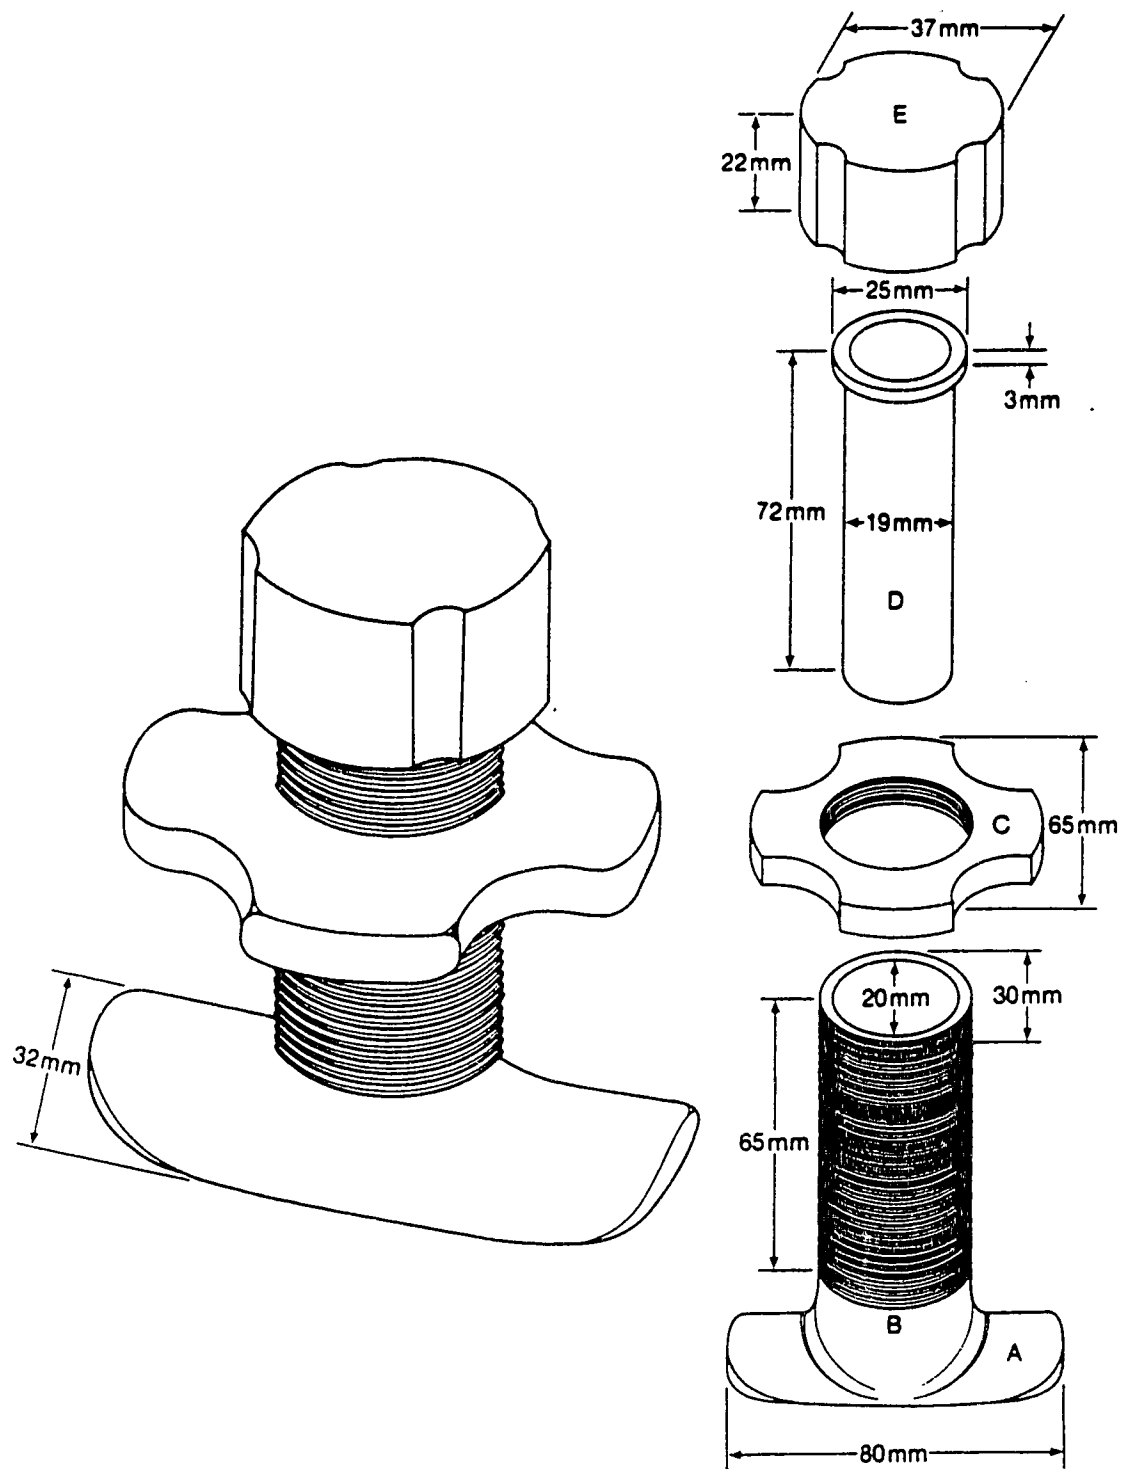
Parts and dimensions of the simple T-cannula.
